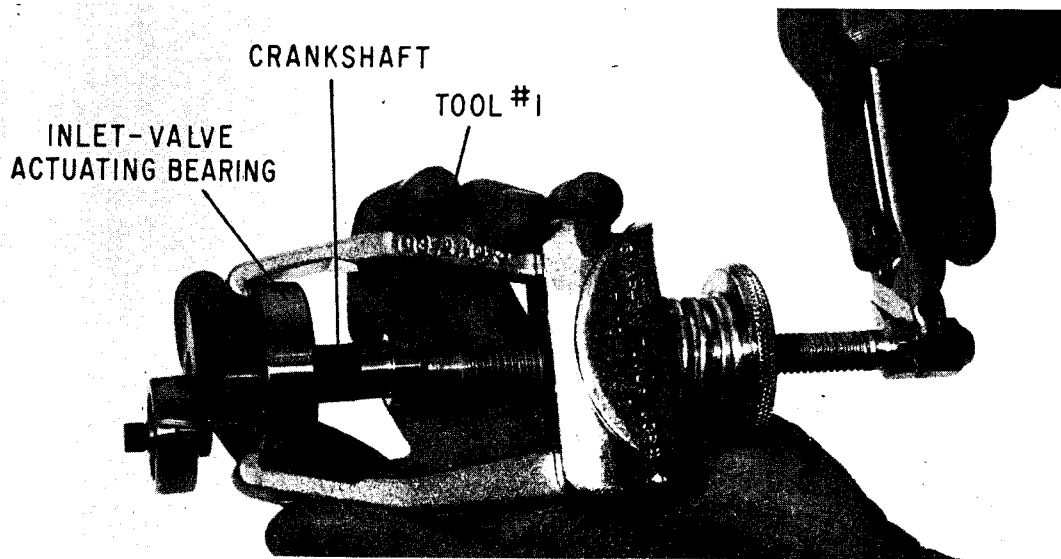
REMOVING THE INLET-VALVE ACTUATING BEARING
